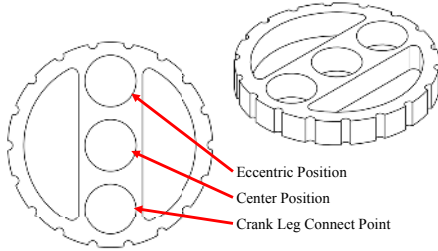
Wheels developed for ECR. This wheel possesses 3 holes: one to attach bearings of crank legs, another to connect the drive shaft in the center position, and the third to connect the drive shaft in eccentric position.
